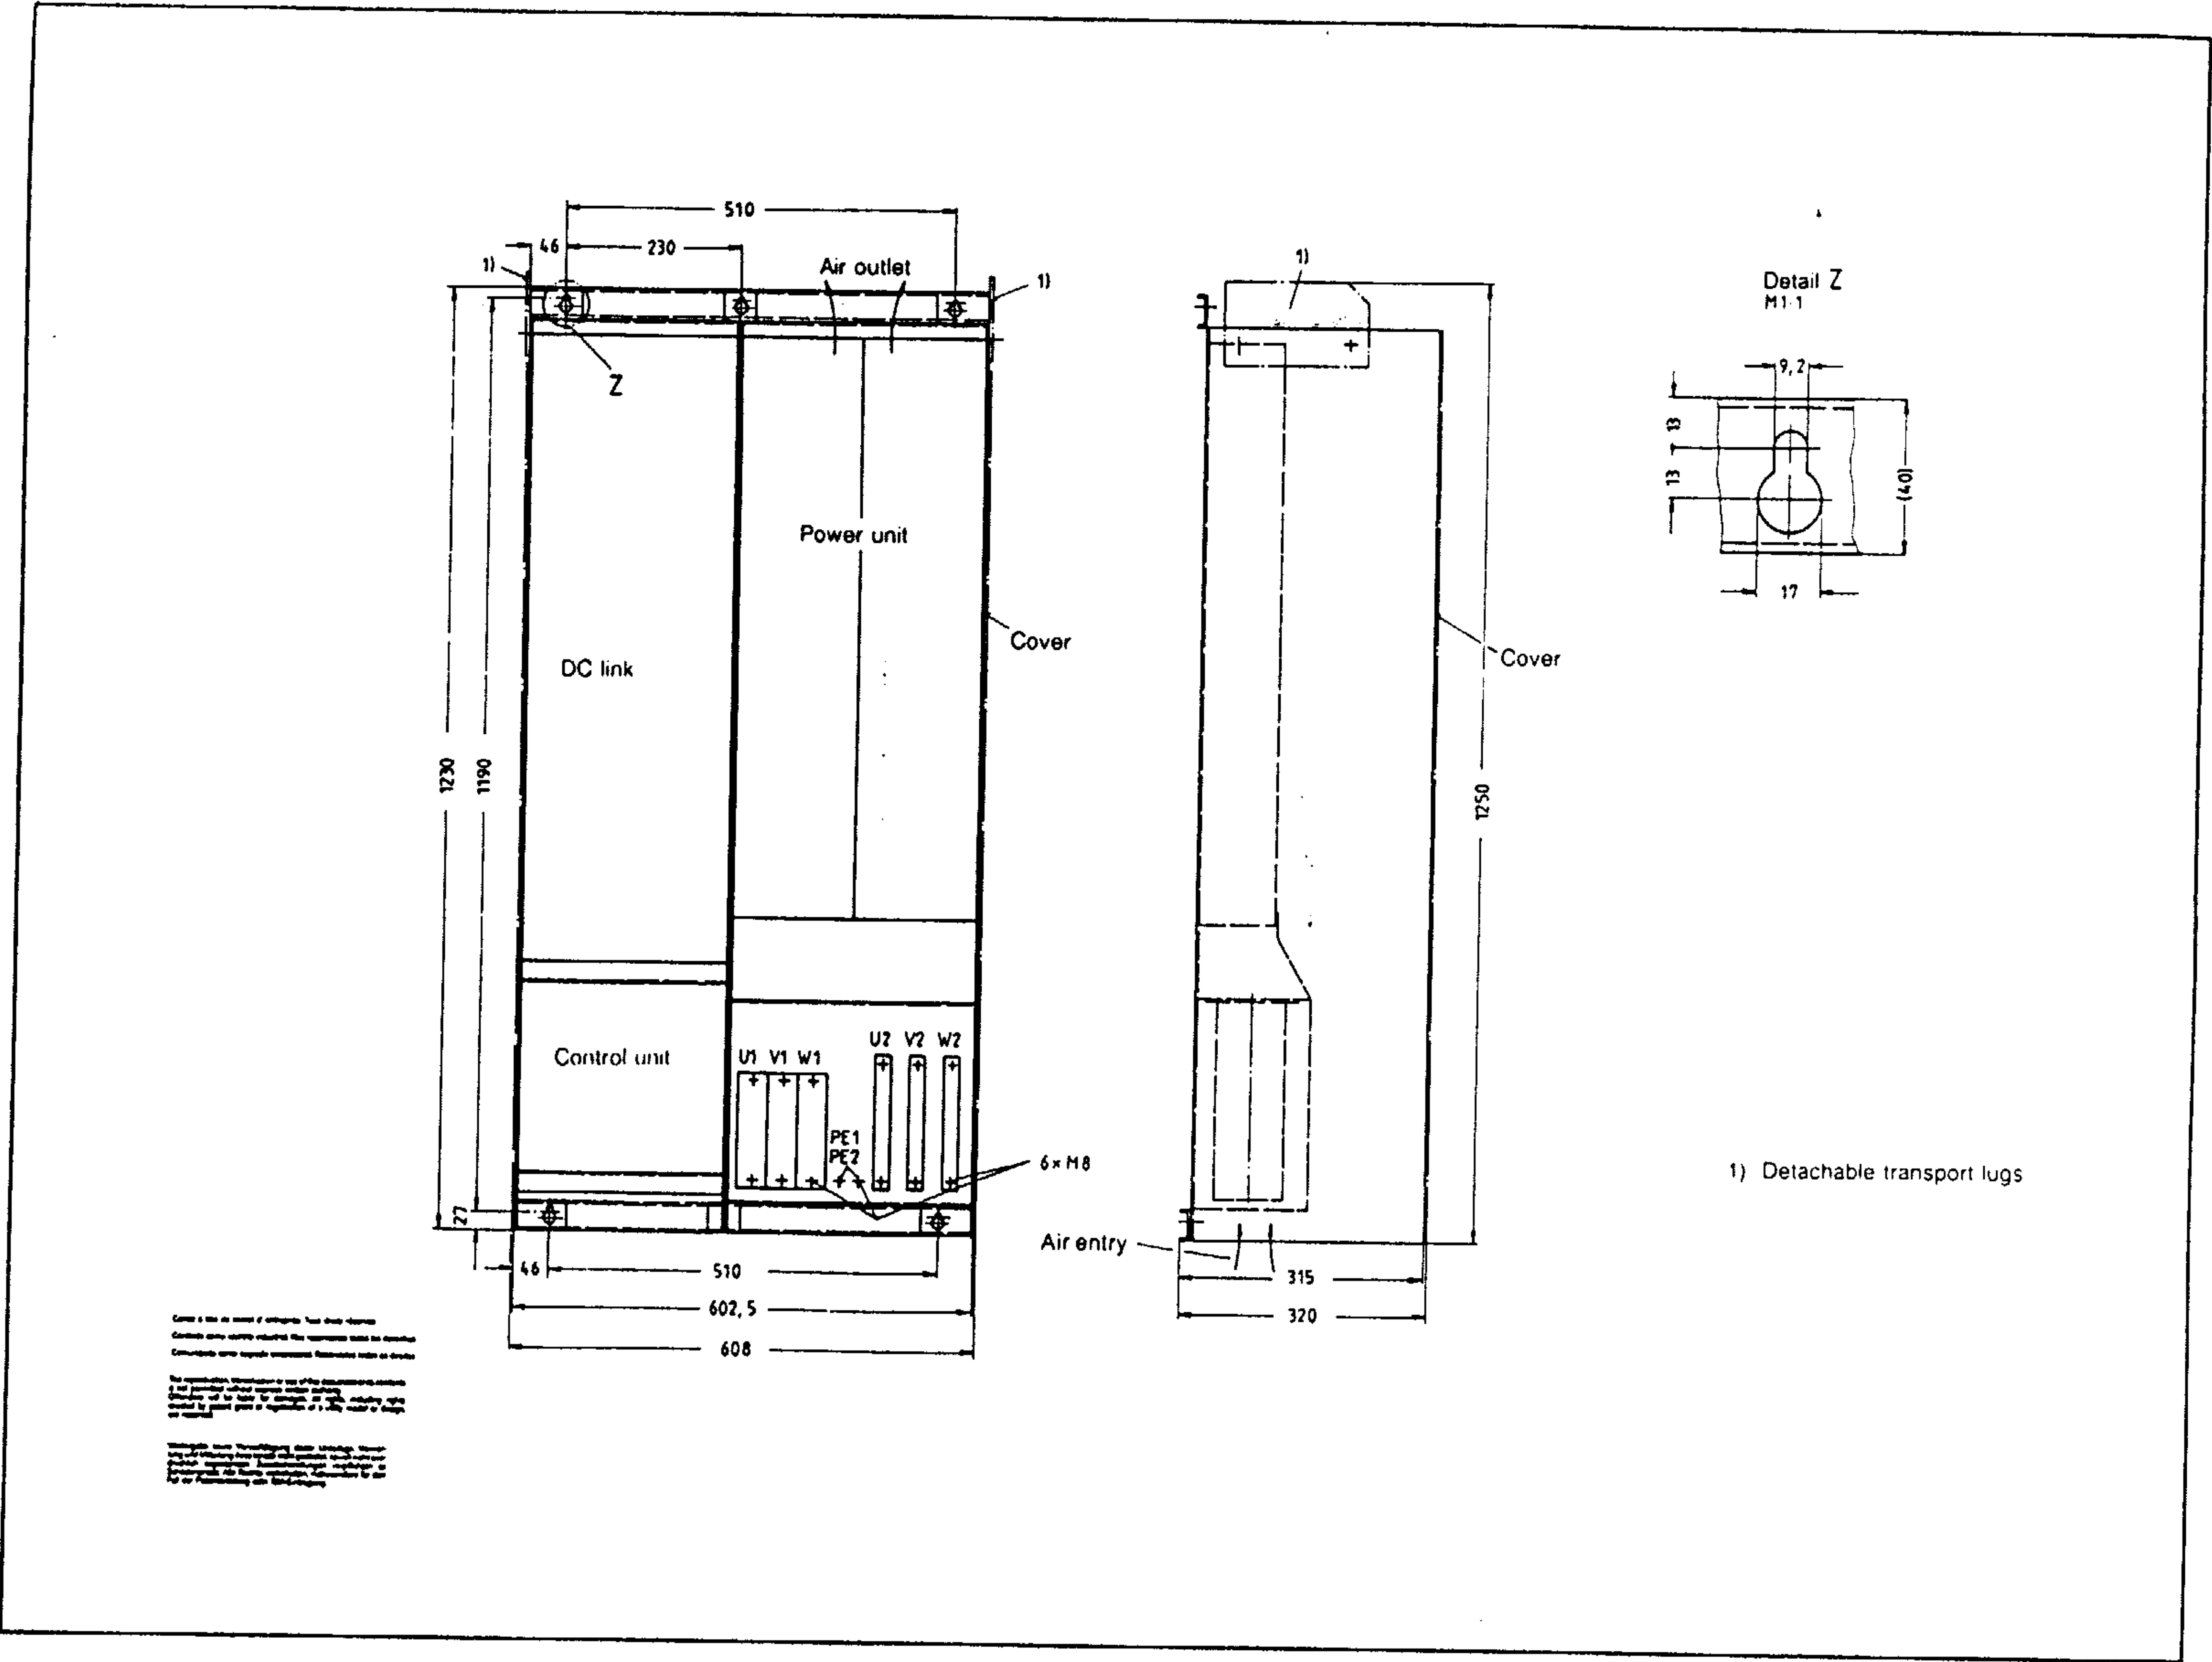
Dimension sheet for PWM converter 6SC6512 (dimensions in mm, not to scale)
